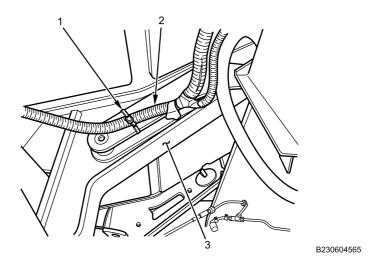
Right Rear of Body in Front of Taillamp Housing.
